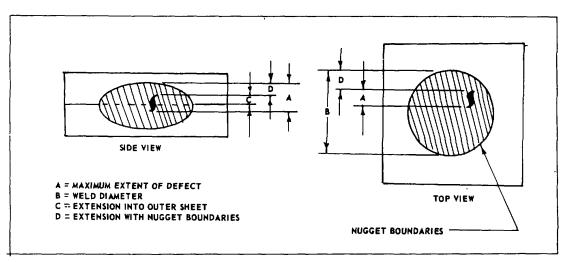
INTERNAL DEFECT - SPOT WELD
